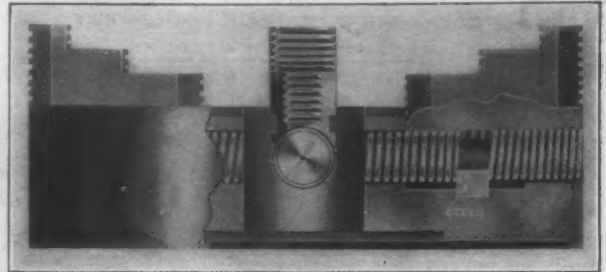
Sectional View, Showing One of the Operating Screws.
